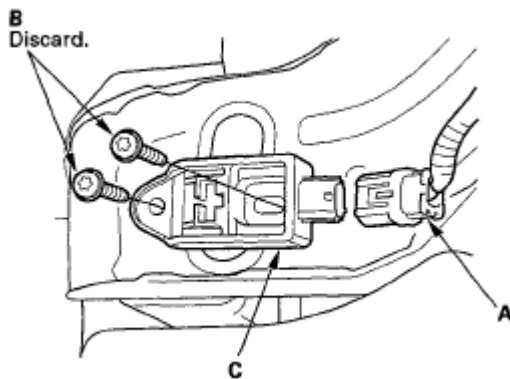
Identifying Engine Compartment Front Impact Sensor, 2P Connector And Fasteners
